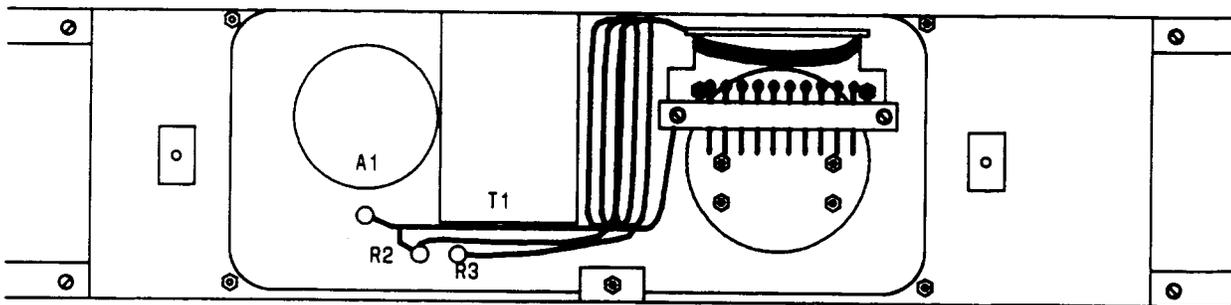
Rear View With Cover Removed—754B Volume Indicator
